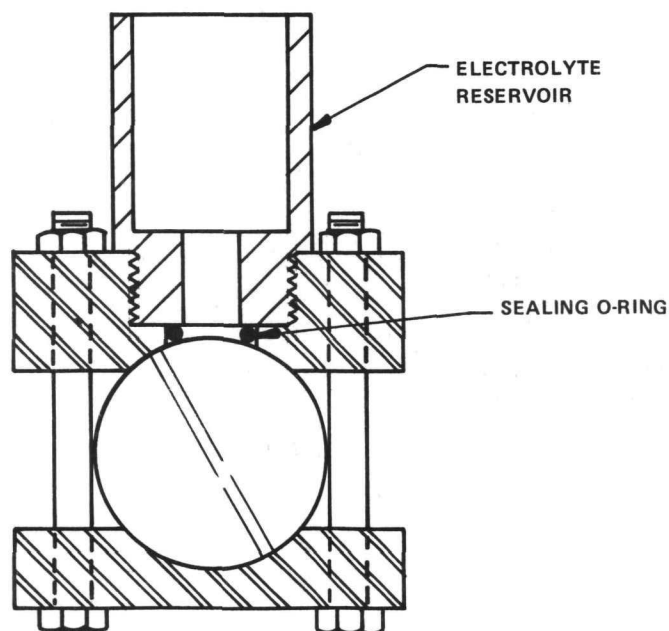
Sketch of test fixture used to remove a portion of the PISA surface.
